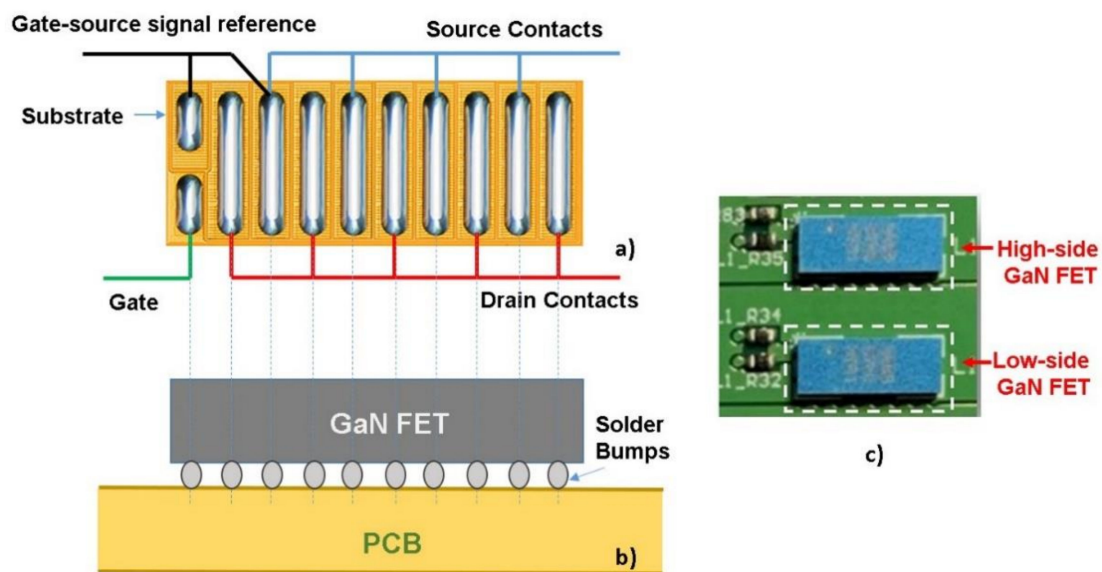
(a) Solderable bars package solution with connection of the source, drain, gate and substrate contacts. (b) Package and PCB assembly. (c) Photo of a top-layer of the PCB with a discrete device in the CSP solution for a half-bridge circuit.
